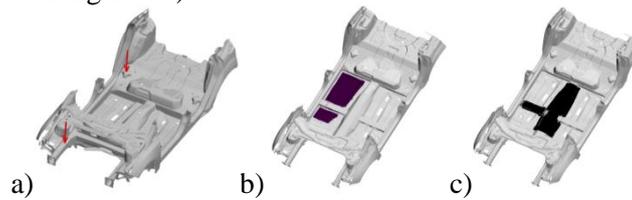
FEM model of the floor variants; a) Reference – b) Floor case – c) Tunnel case
